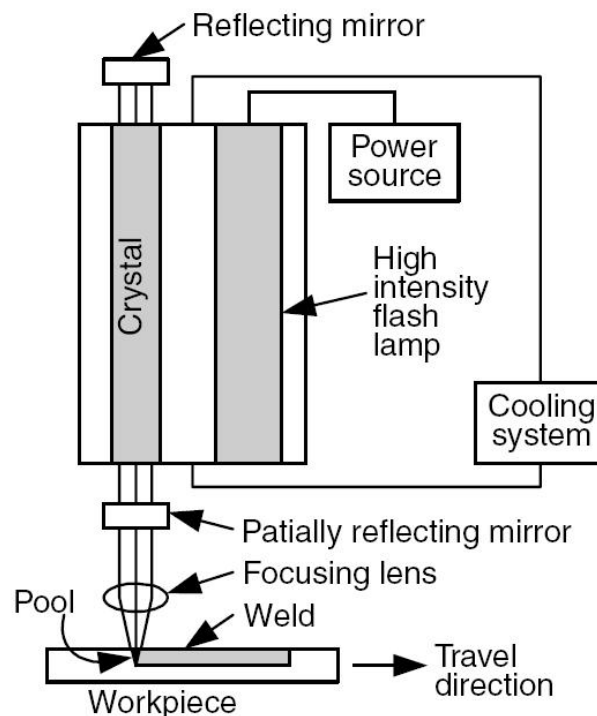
Laser Beam Welding (LBW) Process [6]
